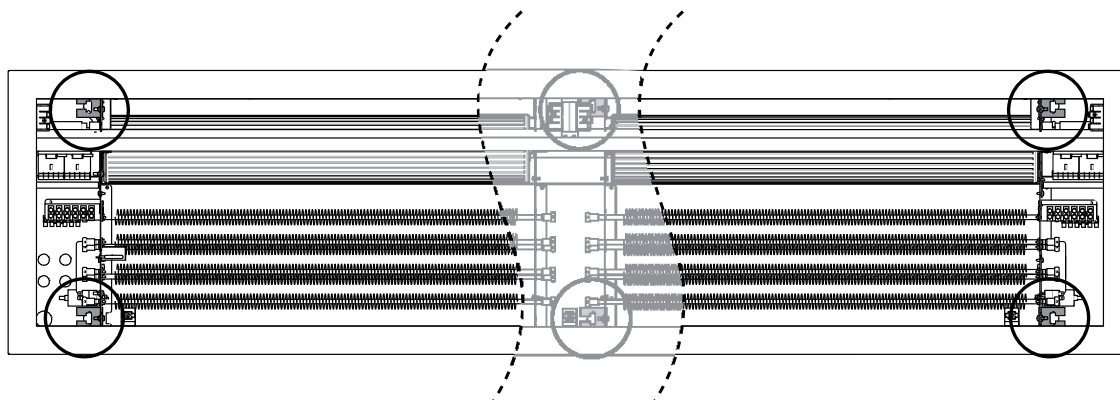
Location of the mounting brackets on the inside of the unit.
